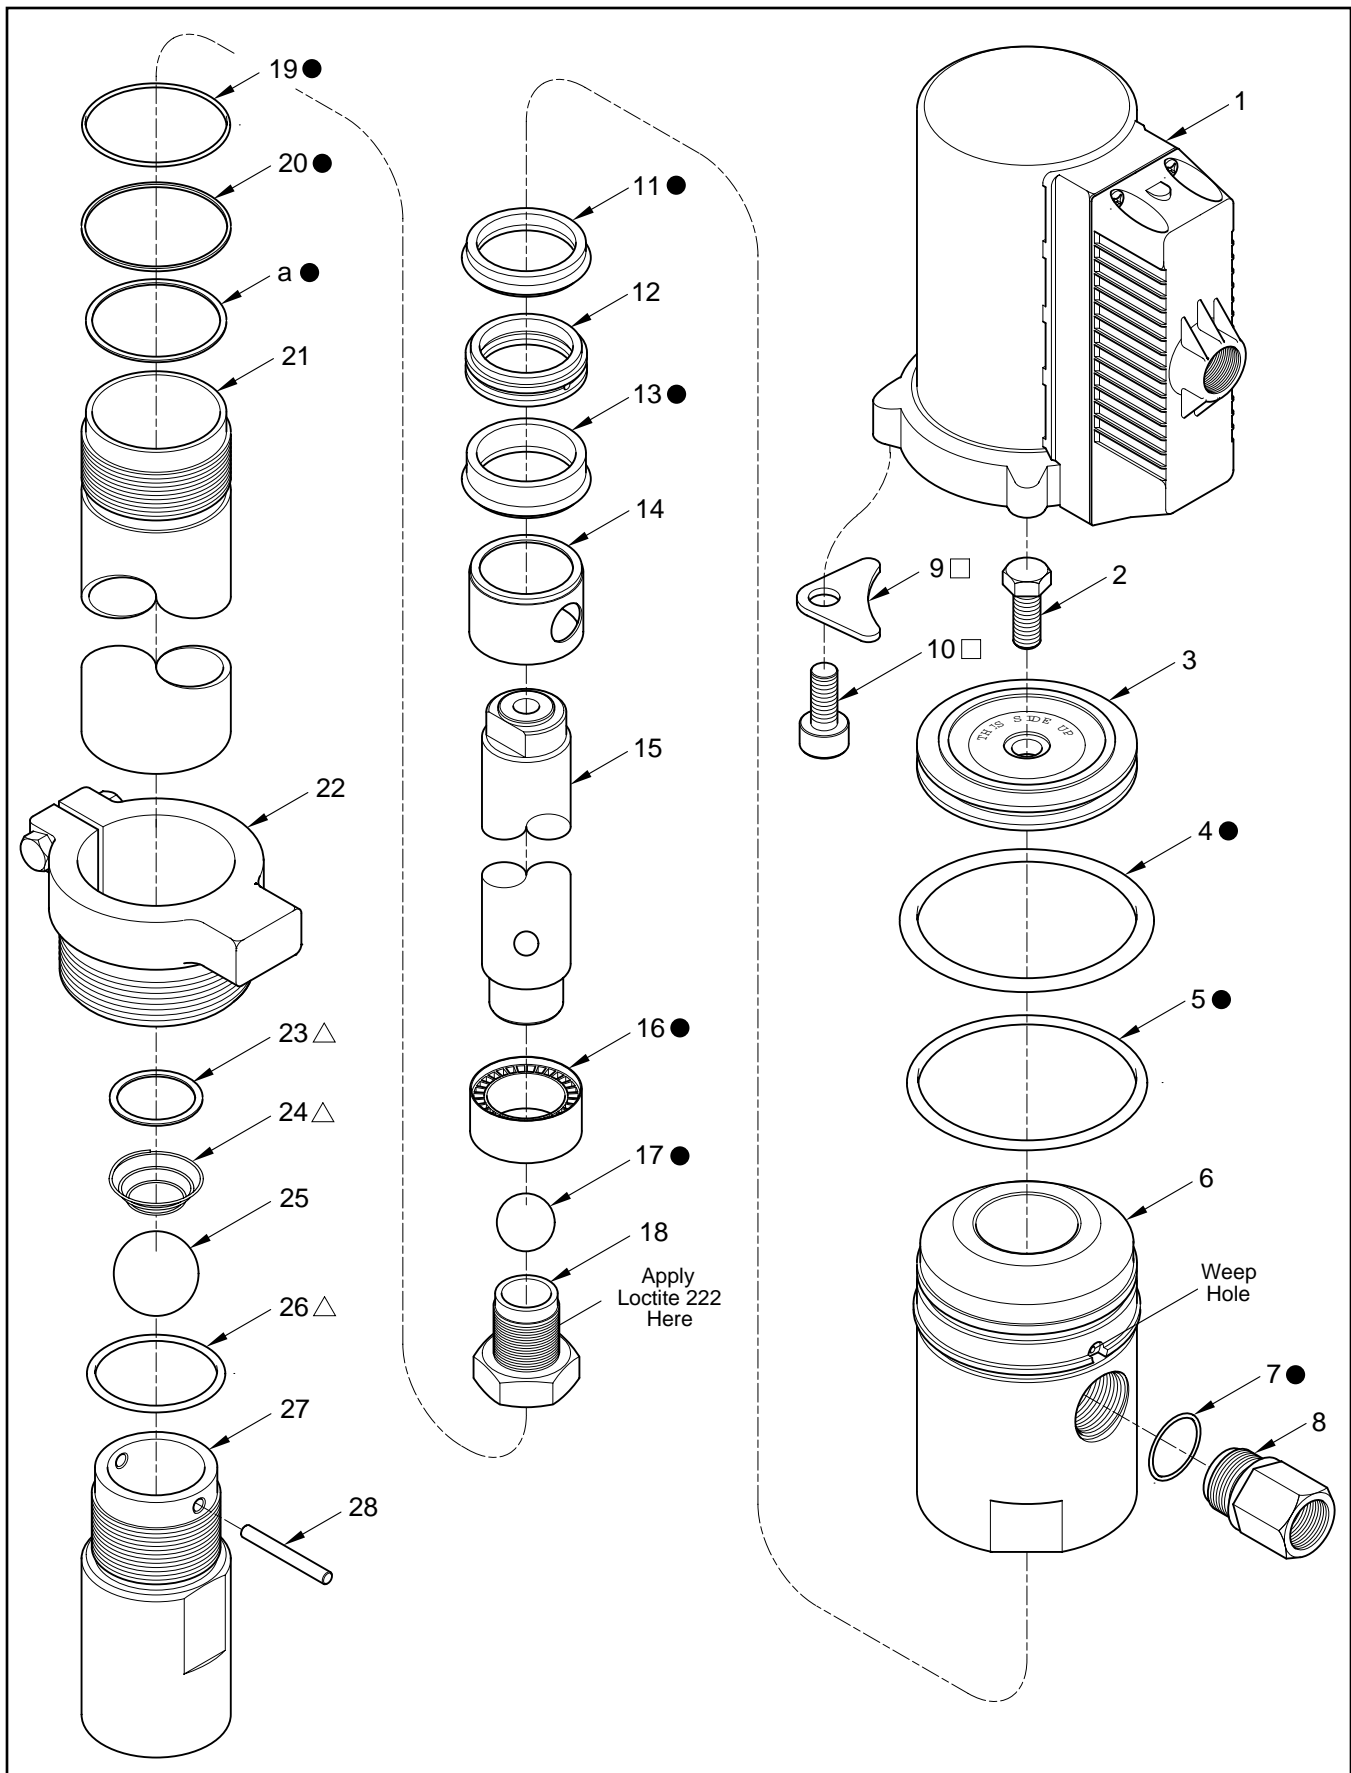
Medium-Pressure Stub Pump Model 9668- Exploded View
